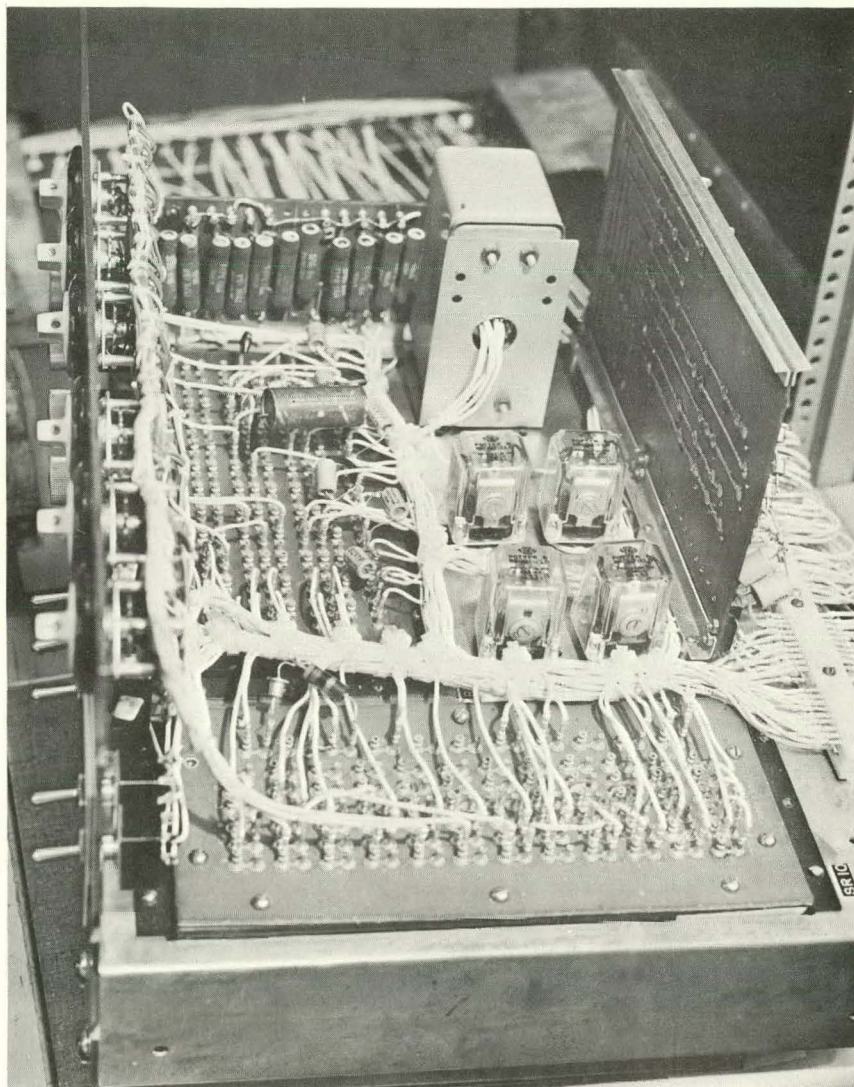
Control chassis, top view (Neg. U-4268-10)
